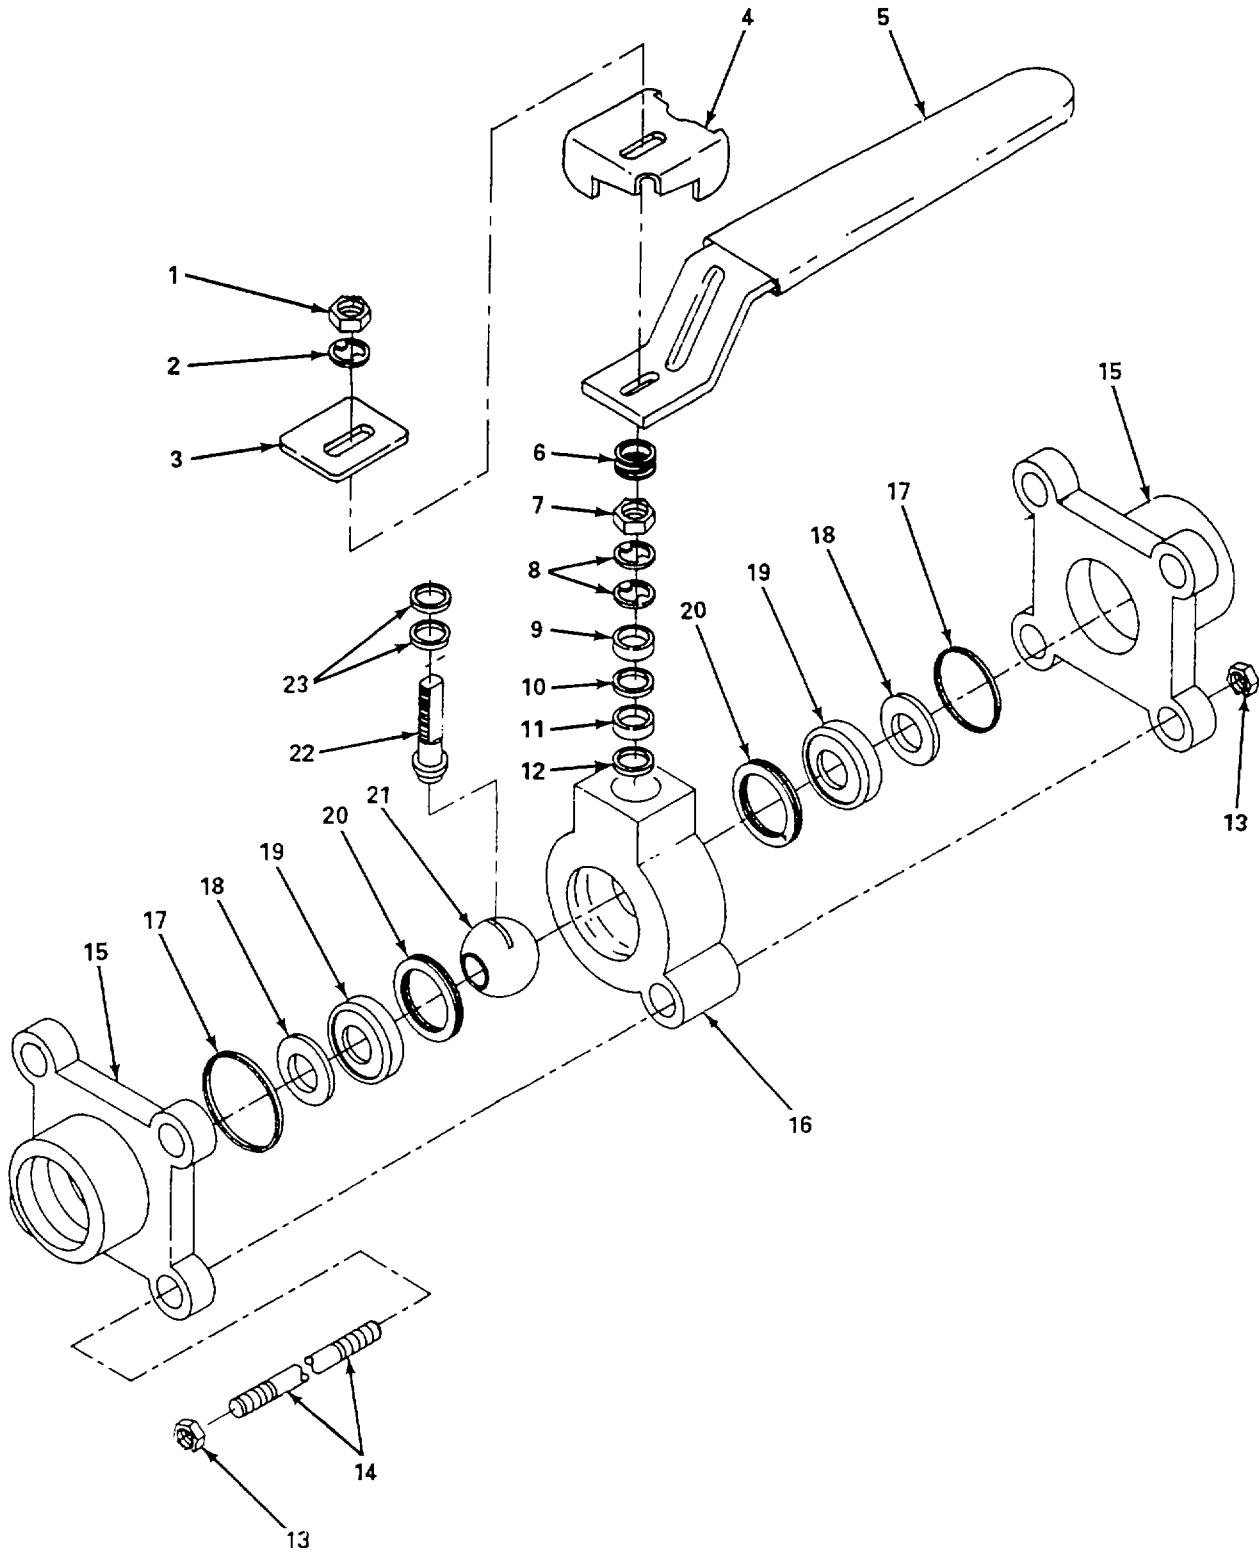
Heater/Chiller Fluid Valves Repair.
